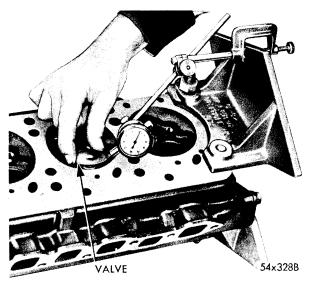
Checking Valve Guide Clearance (SpitFire) (Typical of FirePower)
